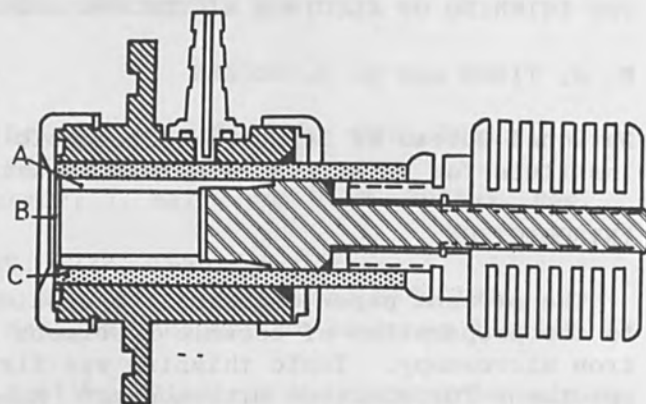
Ion gun showing anode A, cathode plate B, insulating tube C, and outer case for attachment to bombardment chamber.
